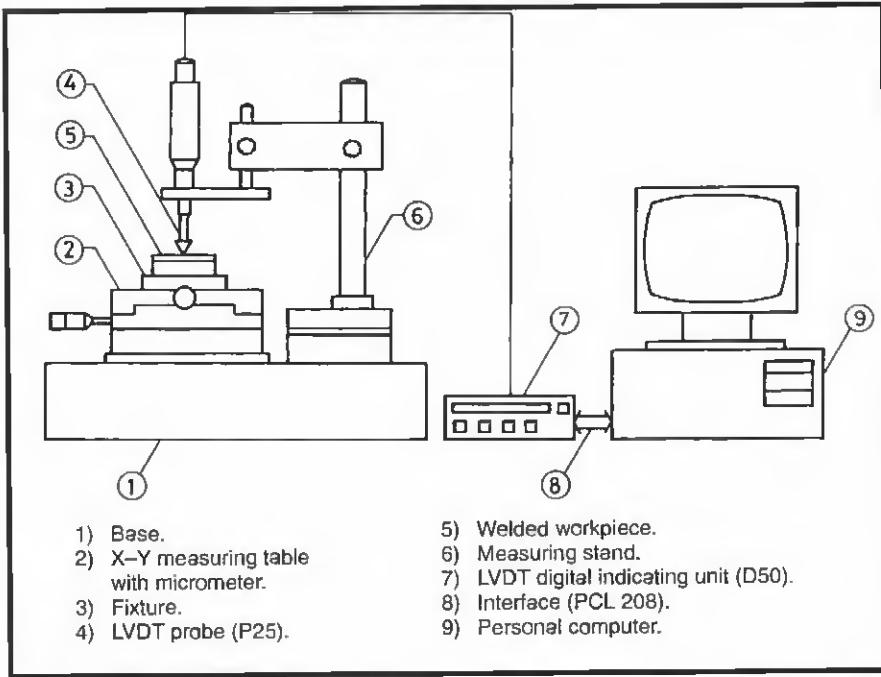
Schematic layout of the linear variable differential transformer (LVDT) experimental setup to measure weld head surface undulations.
